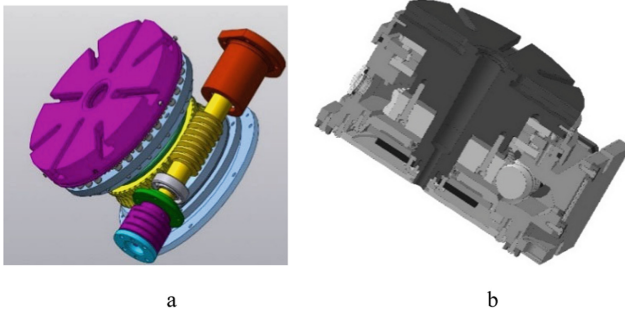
A three-dimensional model of a rotary table with a faceplate: a – general view without housing; b – the cross-section.
